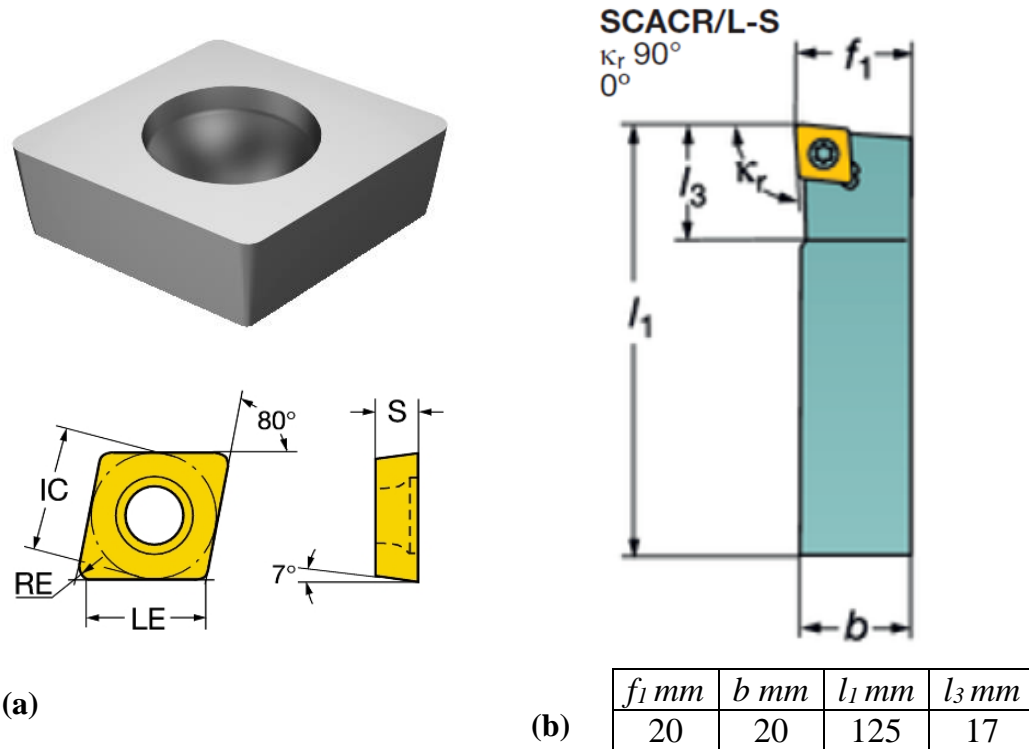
(a) shown the cutting tool insert and (b) shown the tool holder used in this study with the specification
